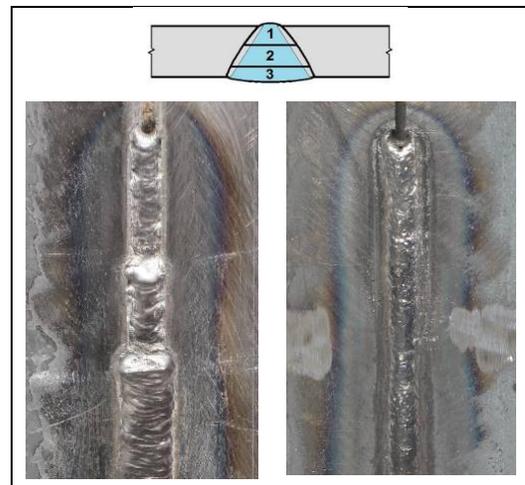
Example of a semi-automatic welding joint using a self-shielded wire (NR-203Ni1). Left: front side of welded joint; right: back side of welded joint.
